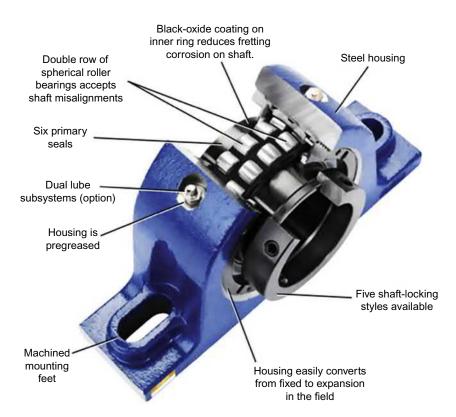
Schematic diagram of a main bearing mounted in a bearing holder.
